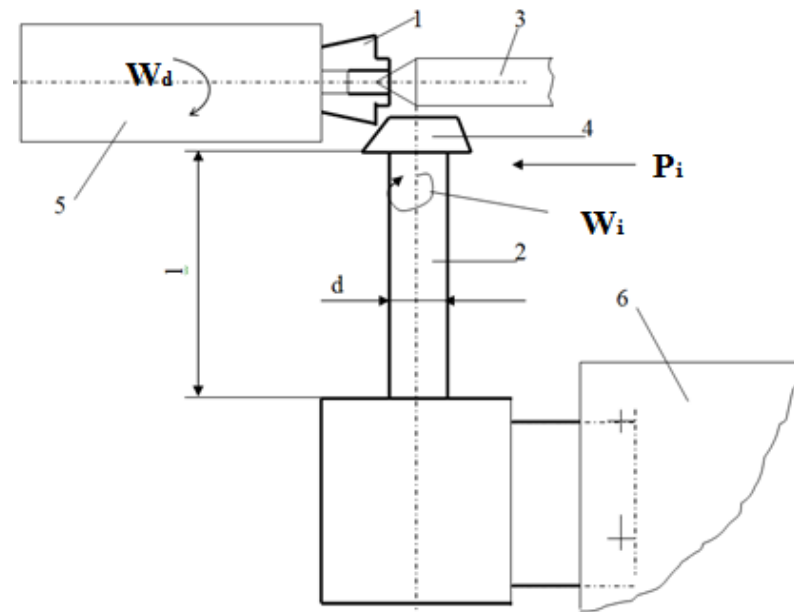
Diagram of the thermo-mechanical treatment of inserts RPUX 3010 MO and 2710 MO: 1 – rolling insert; 2 – knurl rod; 3 – exchangeable carbide center; 4 – carbide knurl; 5 – mandrel; 6 – lathe toolholder
